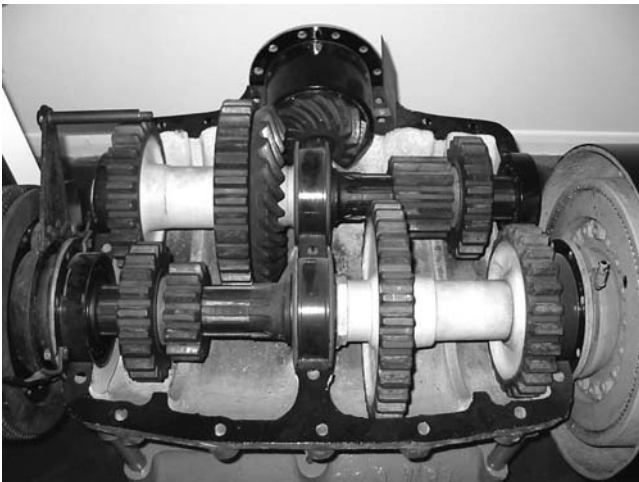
A historic gear box out of a T34 tank showing sliding gear selection for the different gear ratios.
